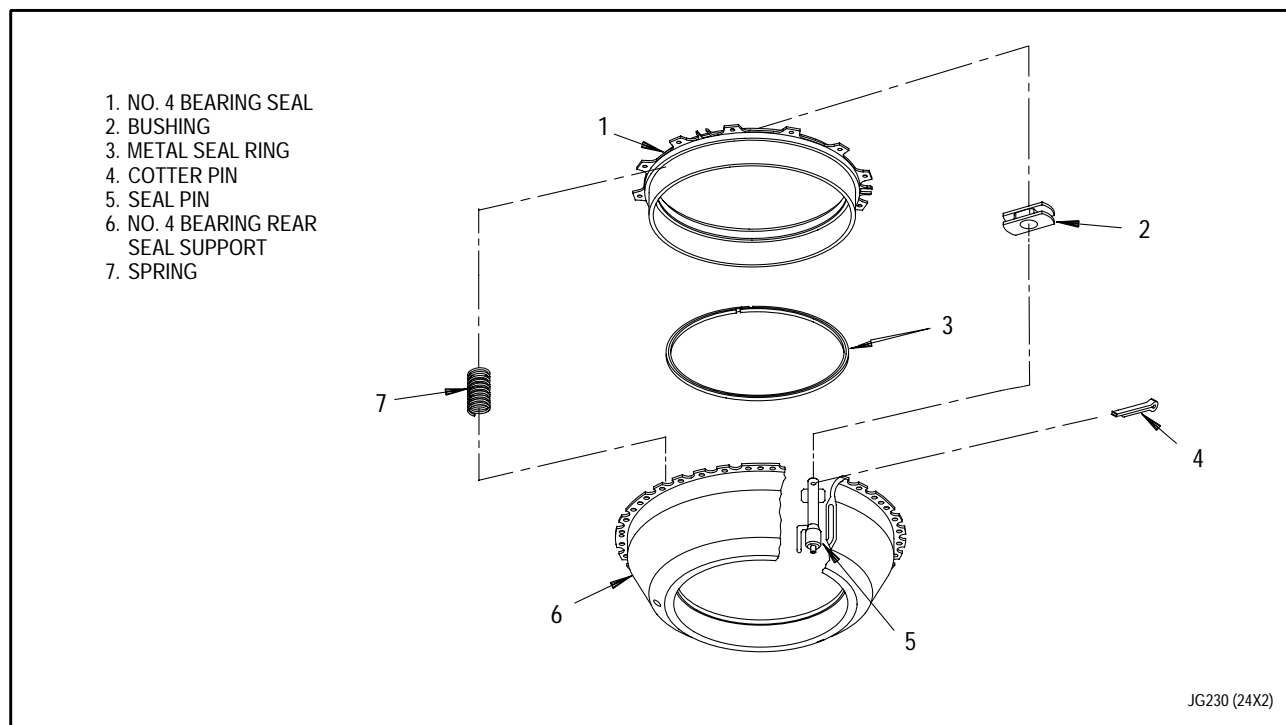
No. 4 Bearing Rear Seal Assembly - Disassembly
